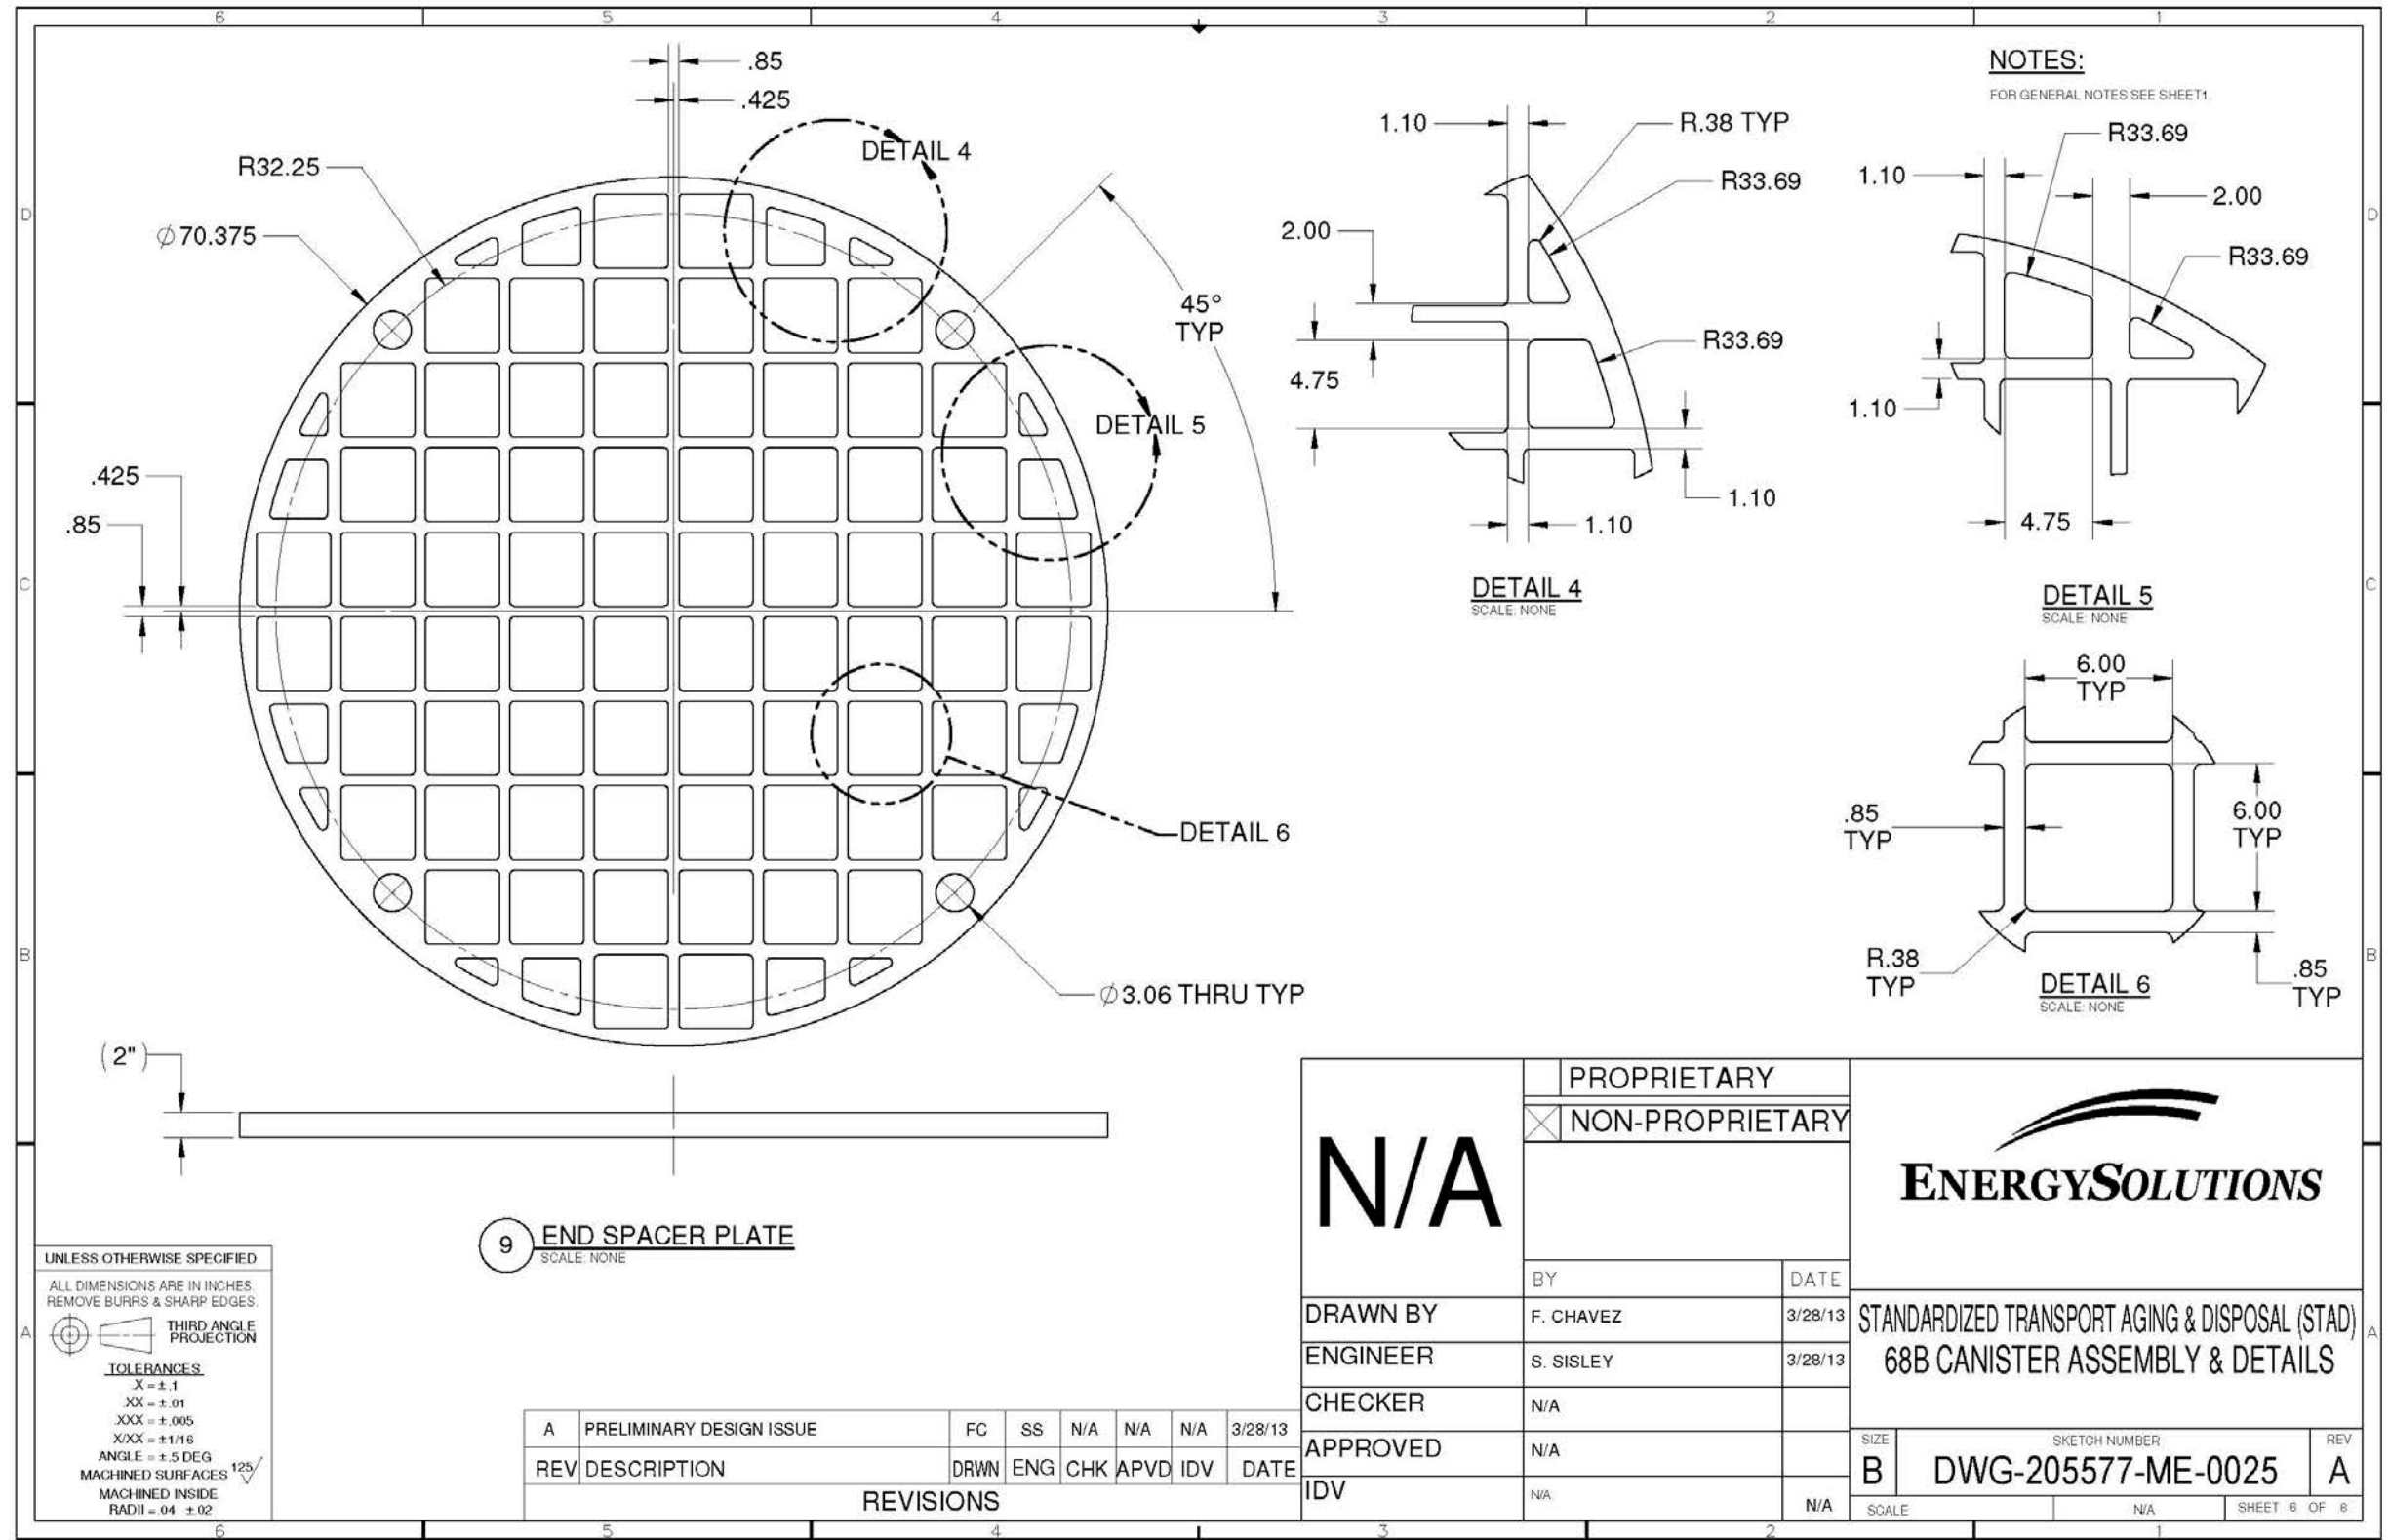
Standardized Transport, Aging and Disposal Canister - 68 BWR Assemblies - Assembly & Details – Sheet 6 of 6
